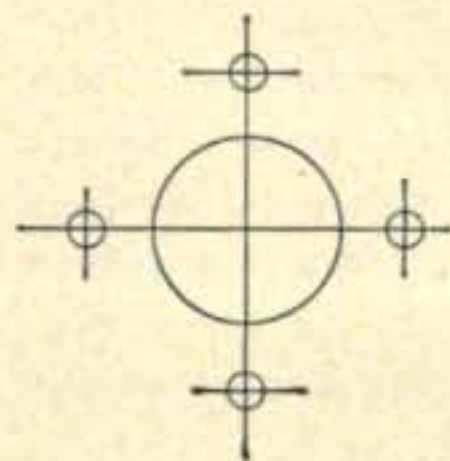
Four socket mounting holes, aligned at right angles, will provide optional orientation of socket to facilitate wiring to it later on.
